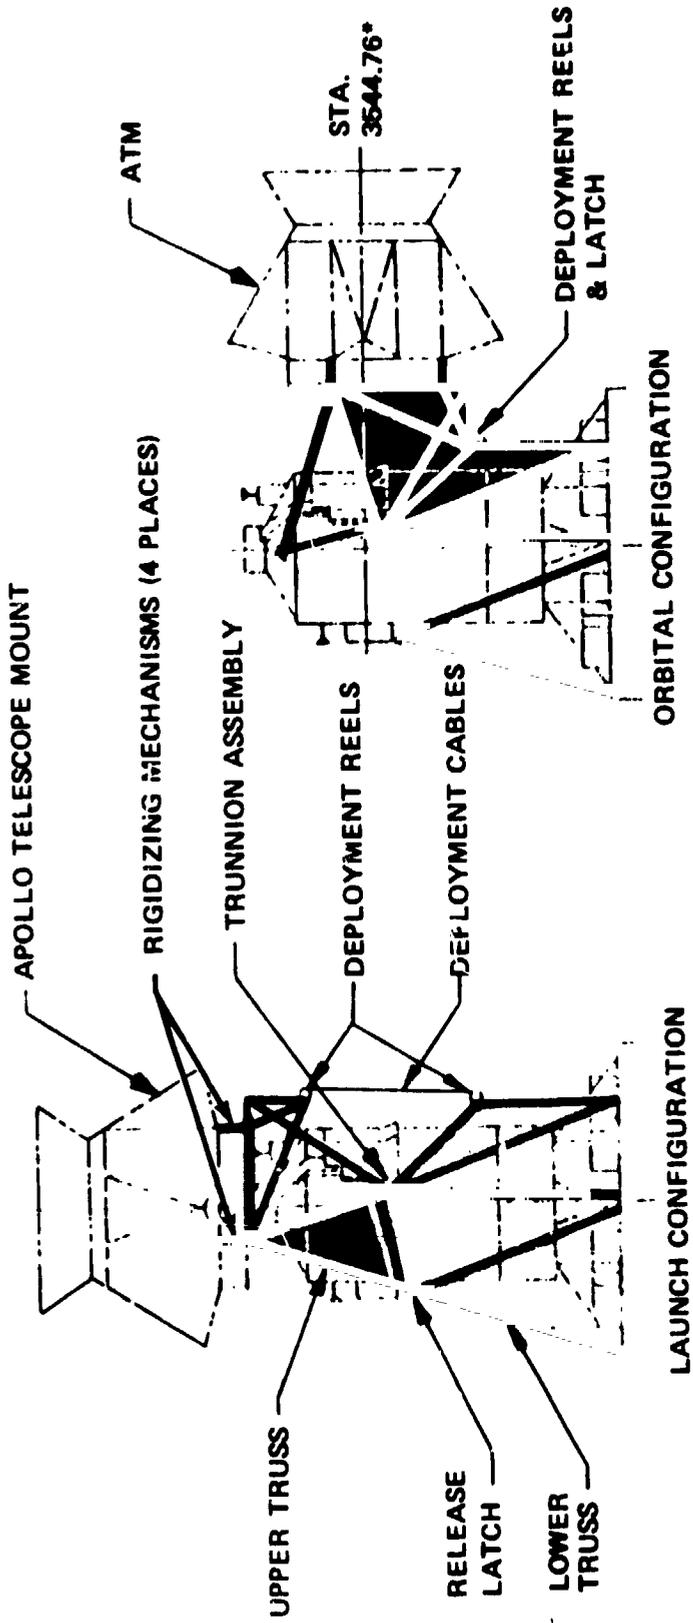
Telescope Mount Deployment Assembly General Arrangement
